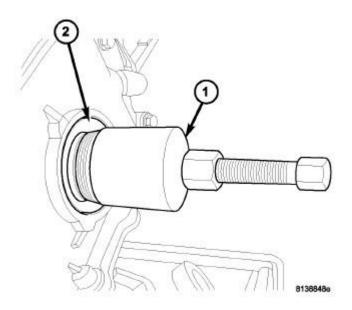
FRONT CRANKSHAFT SEAL REMOVAL Courtesy of CHRYSLER LLC
